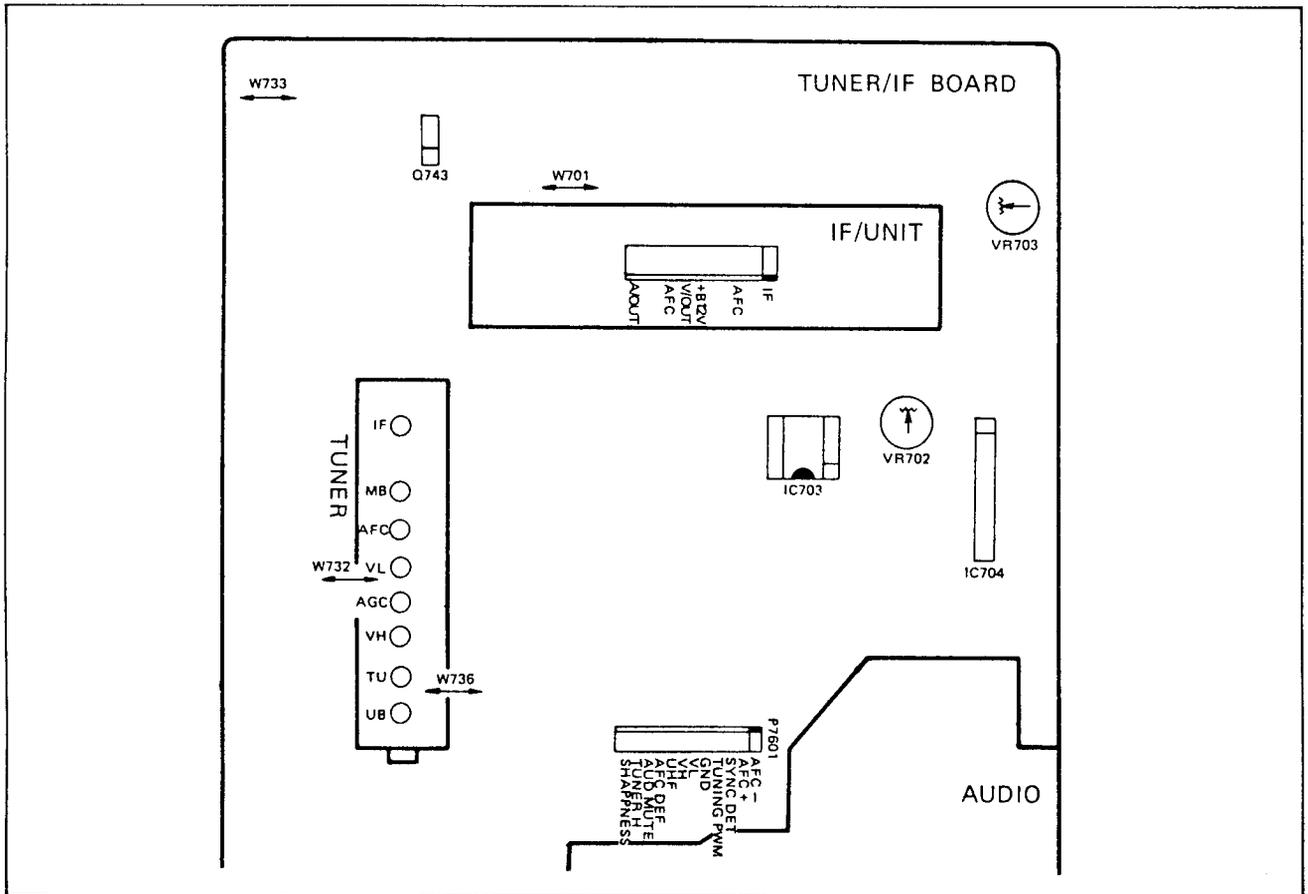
Tuner/IF PCB Test and Adjustment Point
